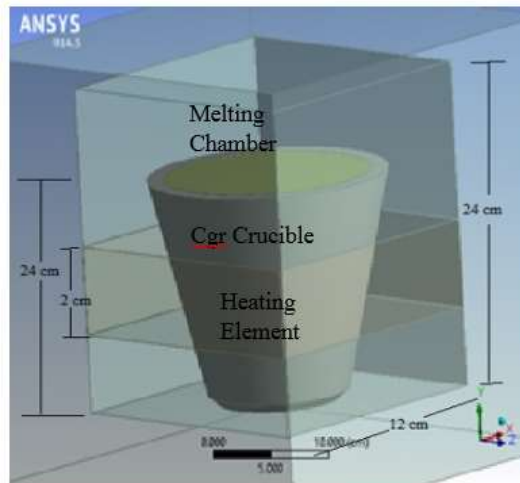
Isometric view of the 4 kg electric resistance furnace using ANSYS 14.5 design Modeler Without Cover
